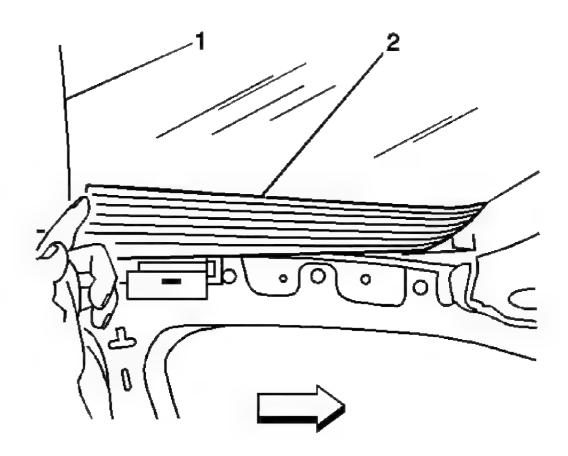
Identifying Sunroof Panel Side Opening Closeout Cover Courtesy of GENERAL MOTORS CORP.
